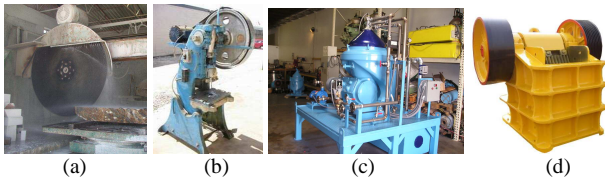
Examples of high-inertia loads: (a) large marble rotary saws; (b) fly-wheel presses; (c) industrial centrifuges; (d) rock crushers.
